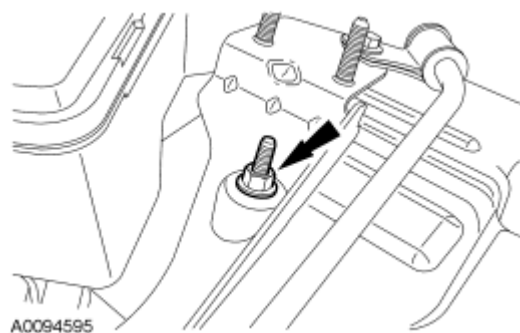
Locating Power Steering Fluid Reservoir Bracket Nut
